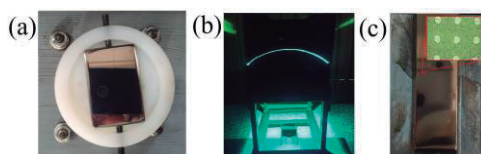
(a) example of a tool with a thin layer of photosensitive resin; (b) UV attack chamber; (c) cathode with textures
